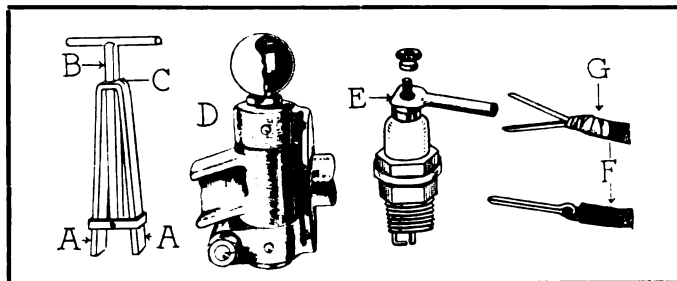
A, B and C, Members of Home-Made Adjustable Socket Wrench; D, Protection for Oil and Grease Cups; E, F and G, Components of Improved Quick Detachable Terminal for Wiring.
